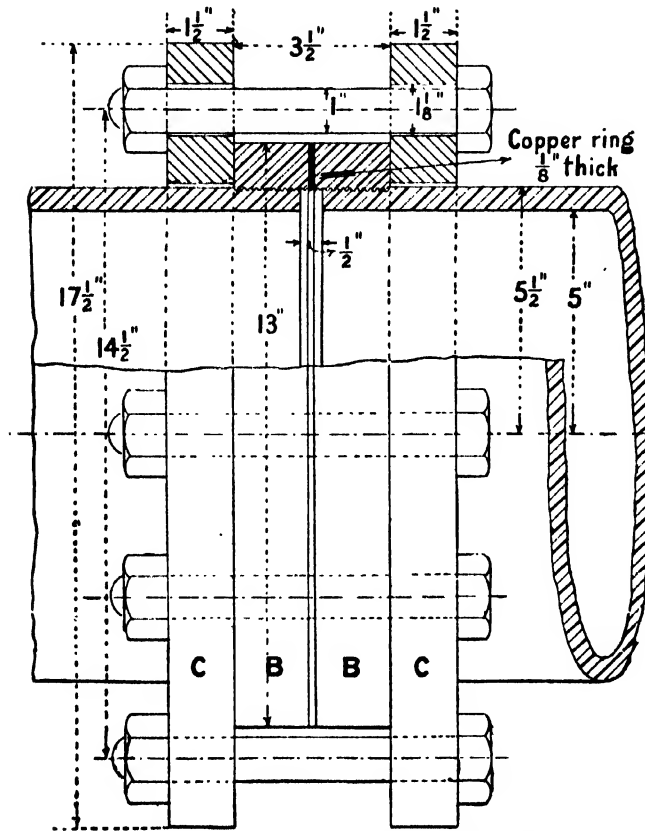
Hydraulic Pipe Joint (Steel Pipes).
